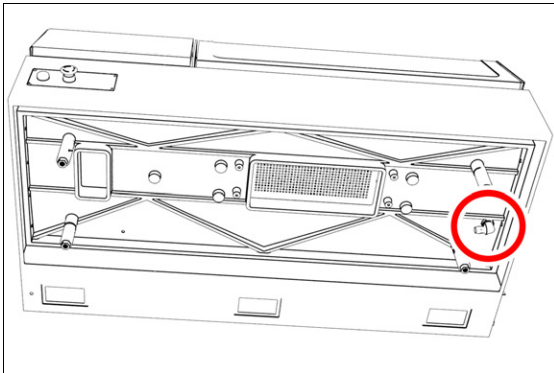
Coolant tube fitting on the bottom of the machine.
